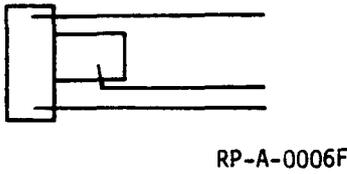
STRAIGHT SPLICE WITH BRIDGE (PAR. 5.5.1.1.1)
